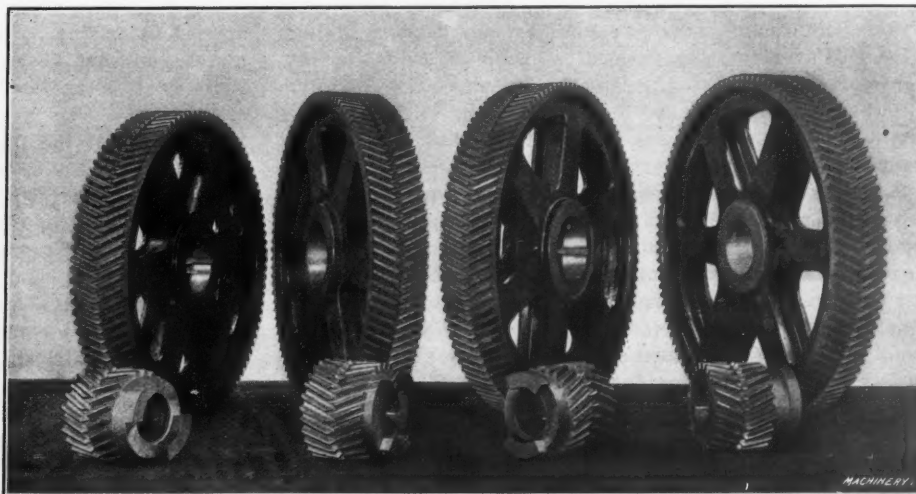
Group of Wuest Herringbone Gears for Rubber Mills
